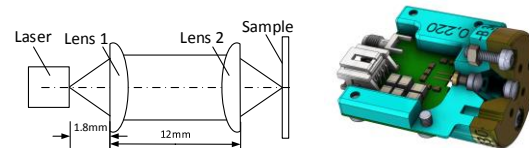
Lens system (left) and assembled laser probe (right) drawing.
